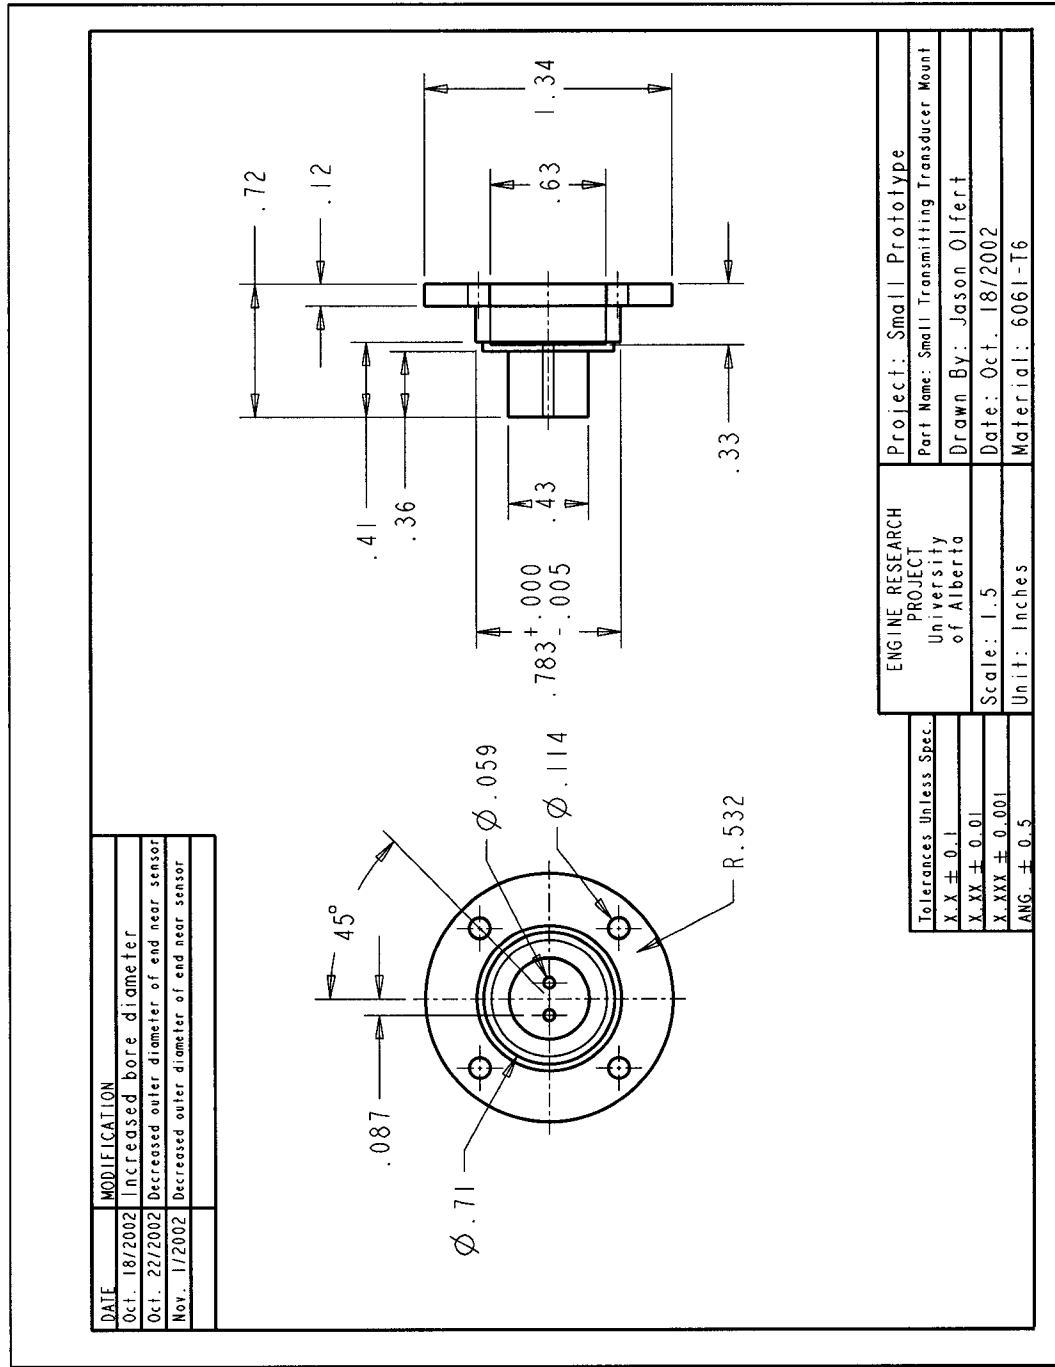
Drawing of Small Transmitting Transducer Mount of Small Prototype
